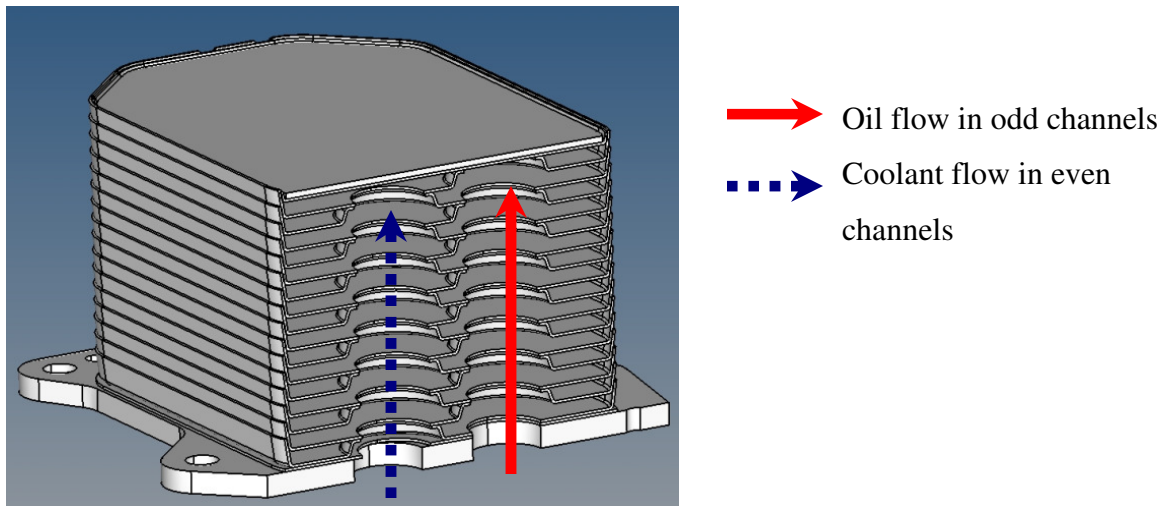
Cut-out view of the EOC showing oil and coolant channels (turbulators not shown).
